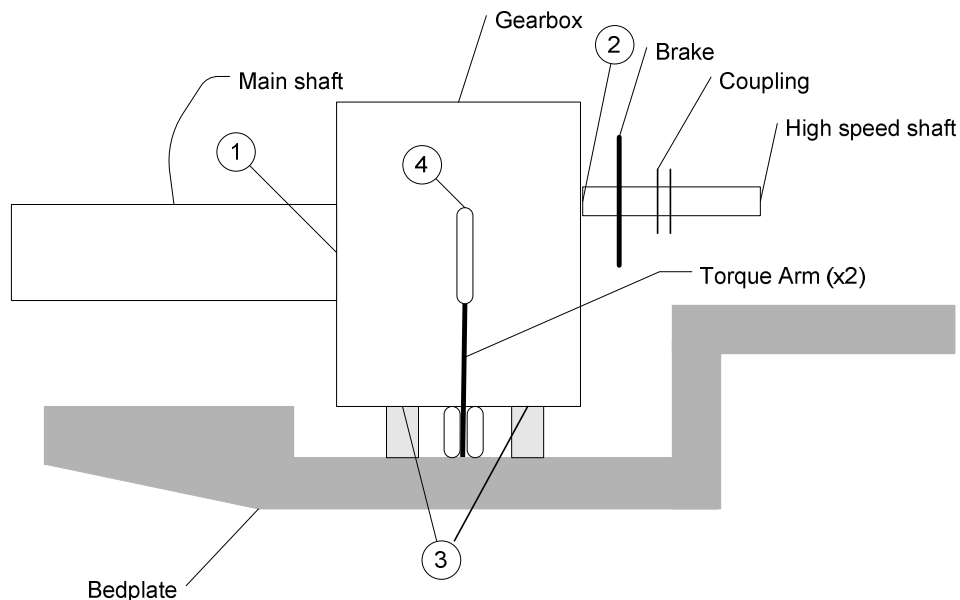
Simplified sketch of gearbox layout without supported systems showing interfaces.
